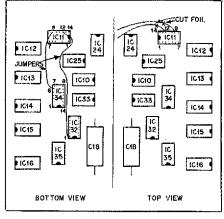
Shown here are the locations of the integrated circuits, the foils to be cut, and the placement of the additional jumpers.
